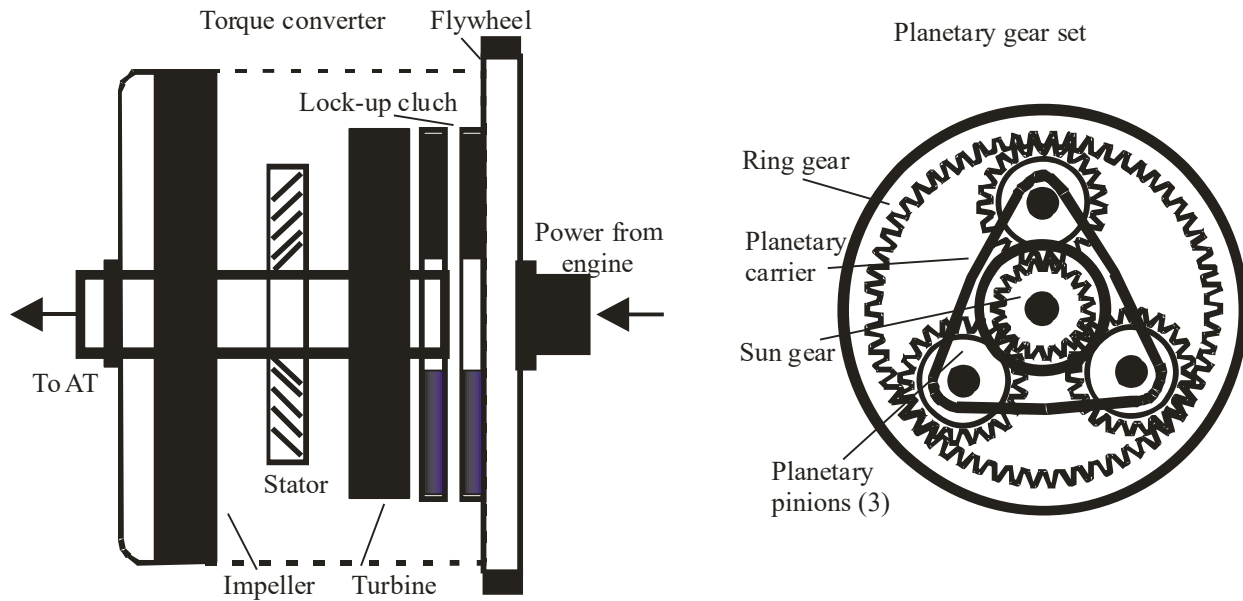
Torque converter block diagram (left) and Planetary gear set (right). Clutch means clutch packs.
